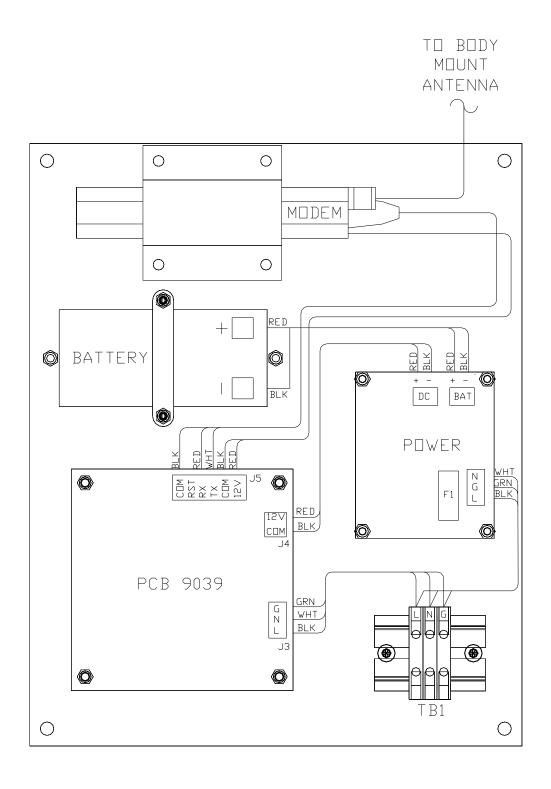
FTW 171-3 / FTW 172-3 CDMA Internal Wiring Component & Layout
